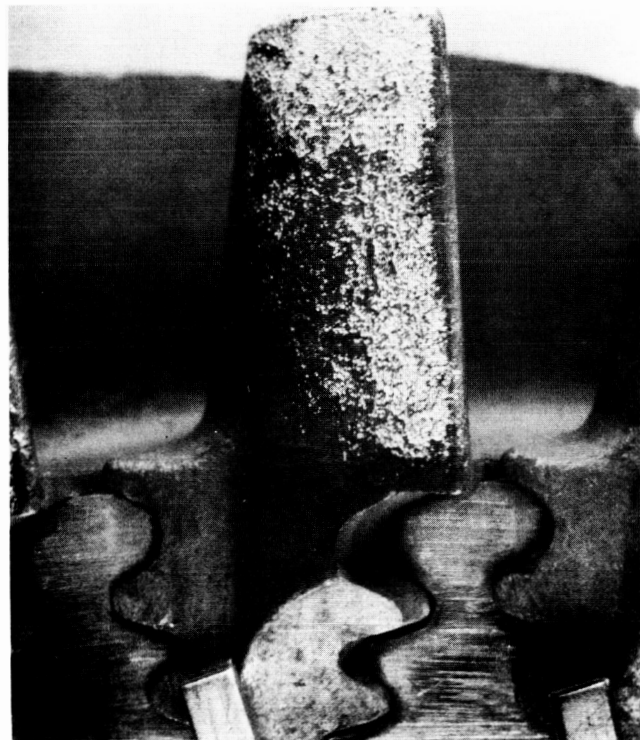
Pure Copper Blade, No. 11, Checkout Test
